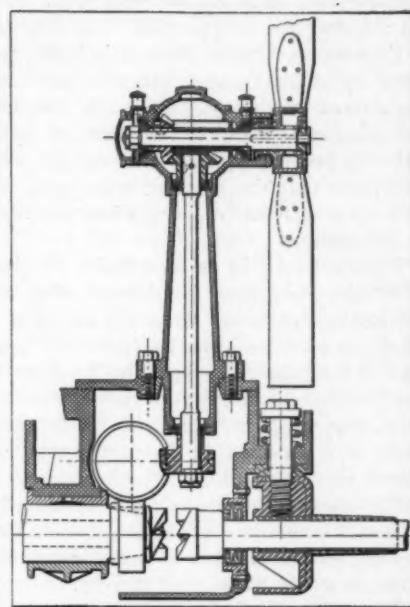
Section of front end of motor and fan, presenting method of driving and details of the starting crank
